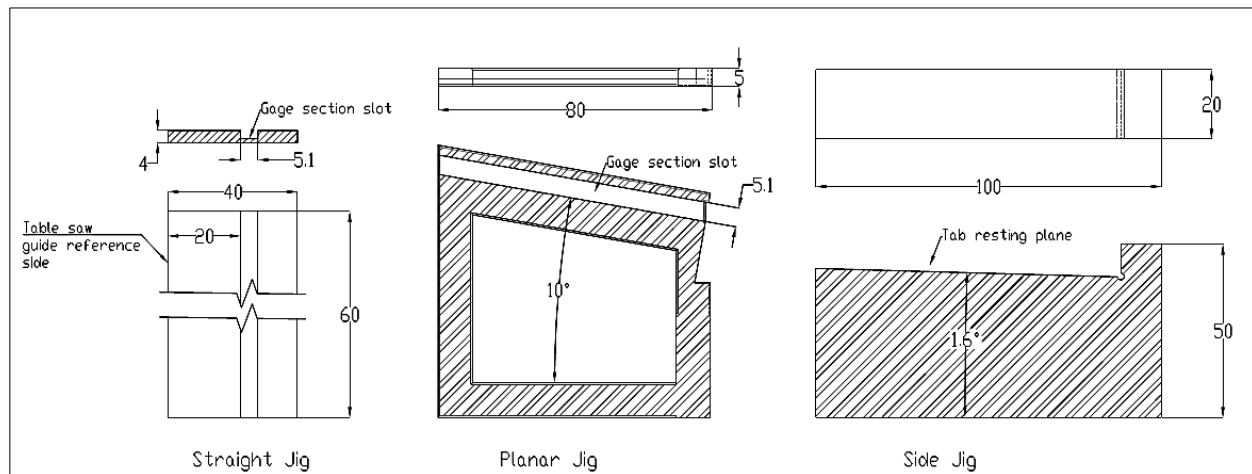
Straight Jig (left), Planar Jig (middle) and Side Jig (right)
